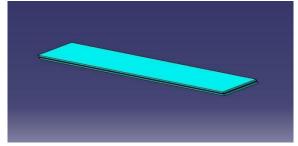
Aluminium Plates with Sandwich Material Thickness 2.0 mm
